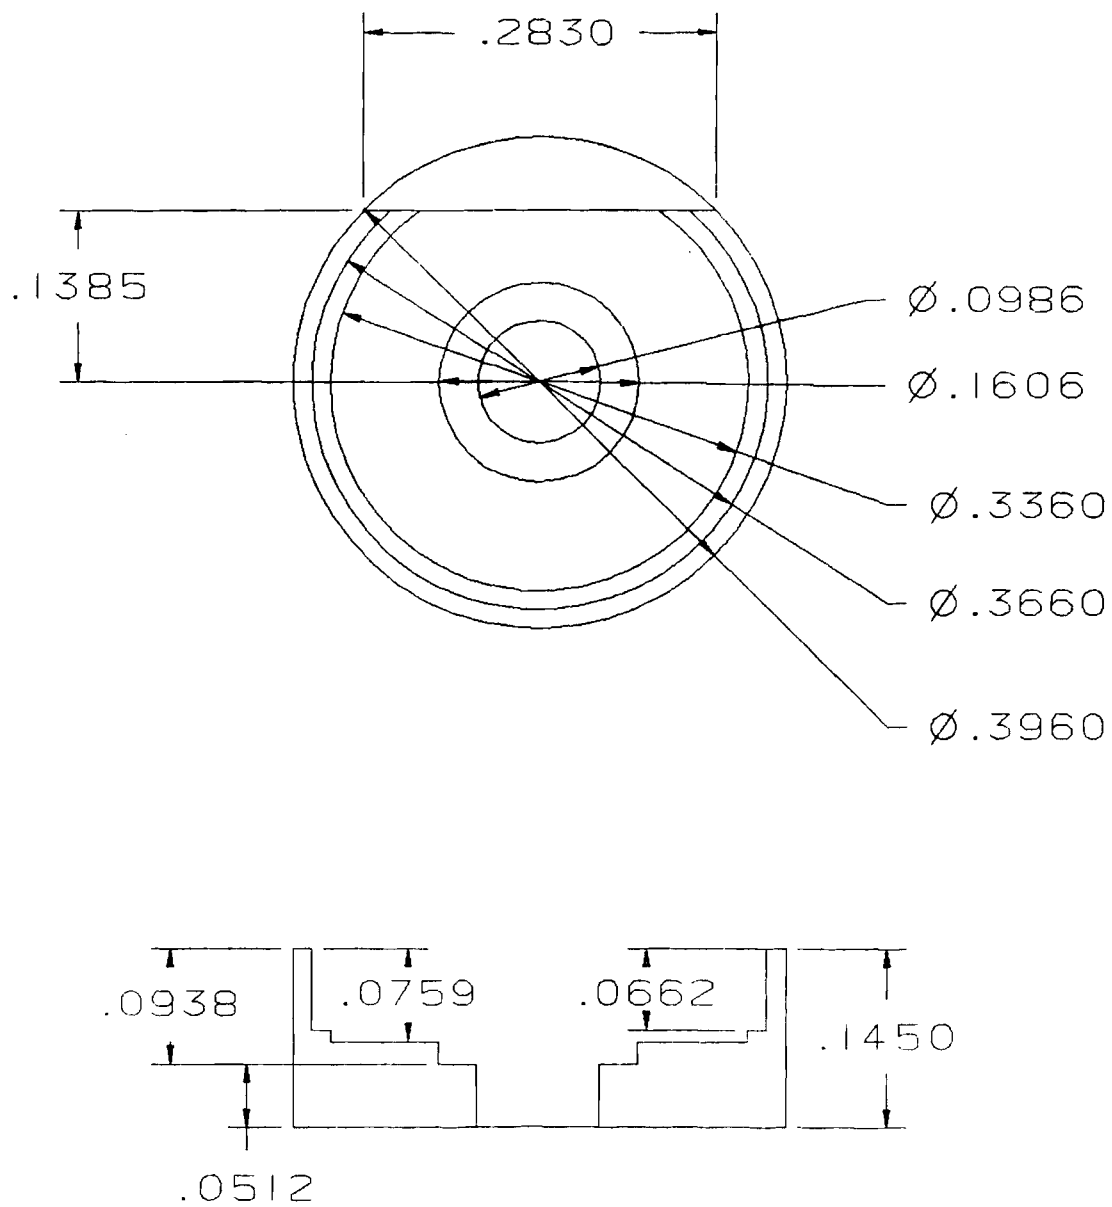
Shop drawing of body half no. 1 for the optical angle sensor. (Dwg. GC091291-01 by JAS using ANVIL, all dimensions in inches.)
